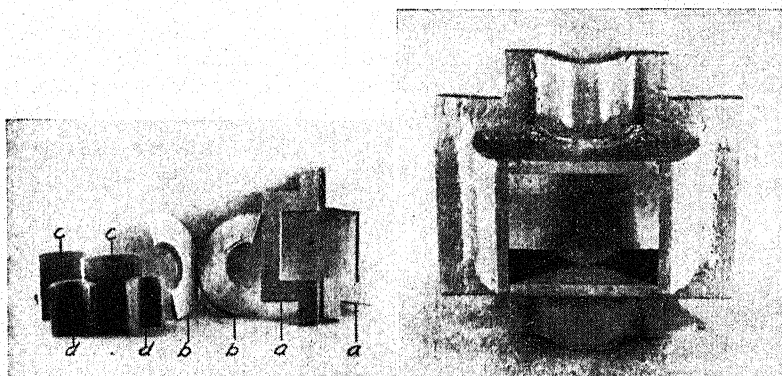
, left, parts of upper half of crankcase; right, upper half of crankcase assembled.
